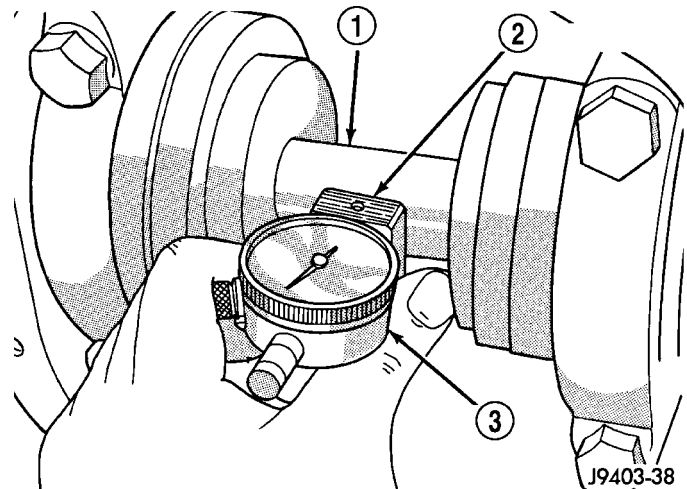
PINION GEAR DEPTH MEASUREMENT
